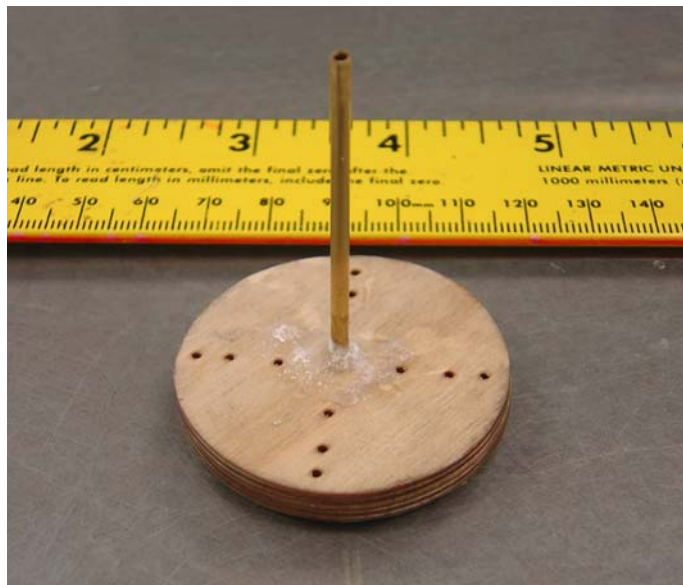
Photograph of the Finished End Cap Assembly
